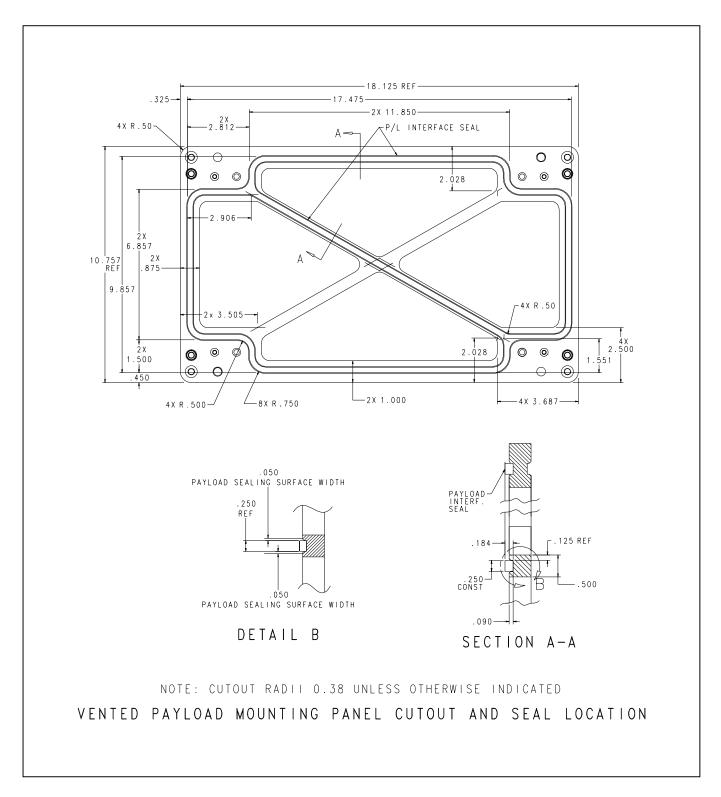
VENTED PAYLOAD MOUNTING PANEL (SHEET 2 OF 3)
